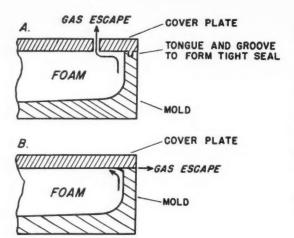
Suggested mold designs to eliminate edge hardness of foam. Mold design A has a tongue and groove arrangement to form a tight seal between the mold and the cover plate and a gas and foam escape vent well removed from the edge of the molded half cushion. Mold design B has an inward inverted lip which forces the gas and foam to be directed inward initially, after which they escape along the cover plate underside.
